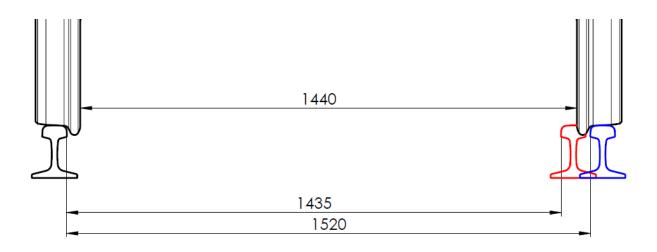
Asymmetrical layout, wider gauge wheel-set
